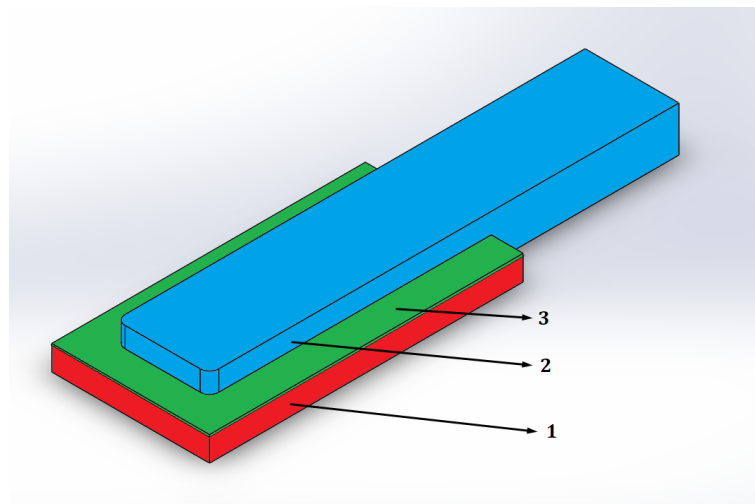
Three-dimensional CAD model designed for the new geometry approach. 1- Support, 2- Specimen, 3- Enclosing layers.
